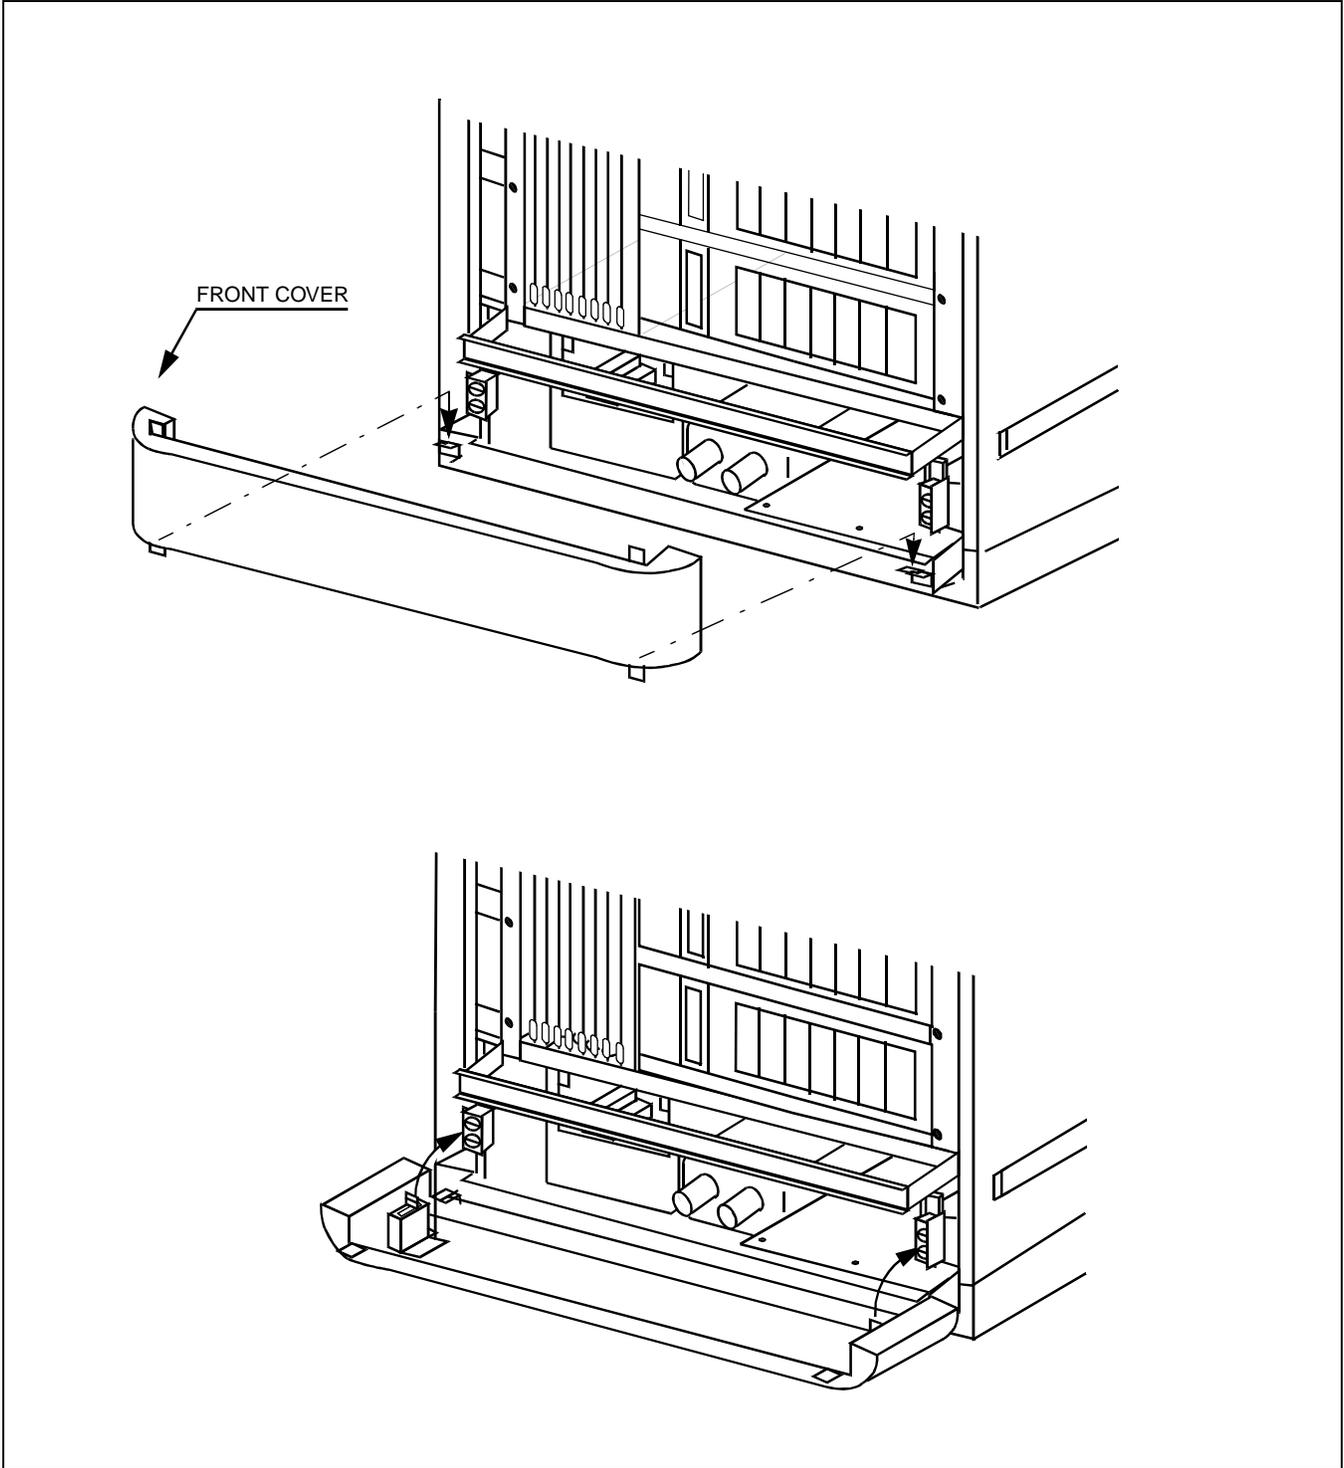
Front Cover Mounting Method (BASEU+LPM+PIM0)
